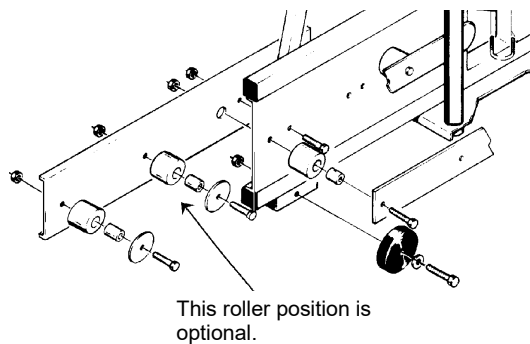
Installing the Frame Extensions (viewed from rear of frame)
